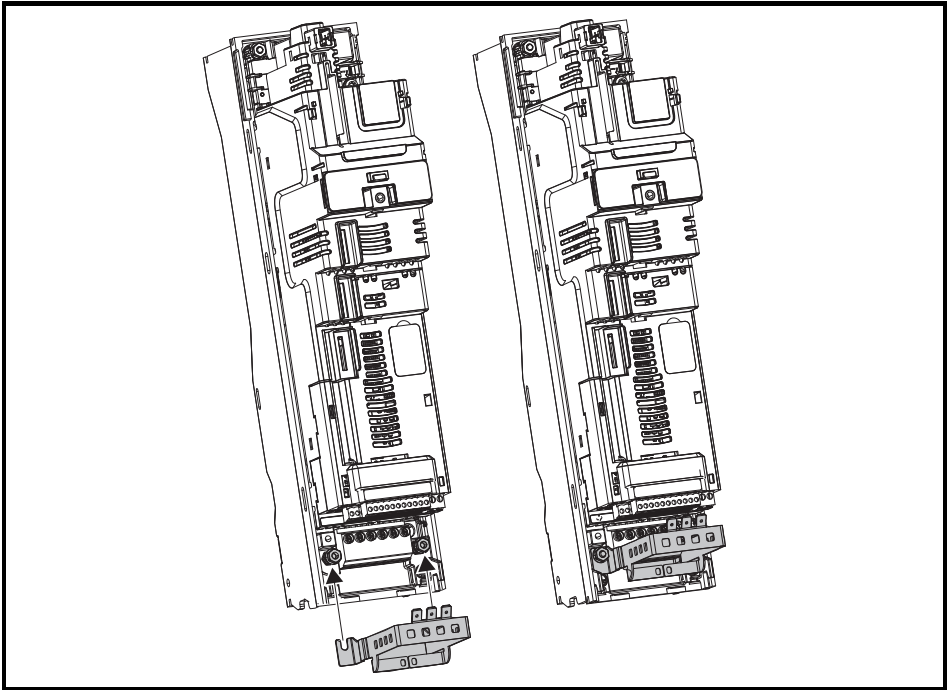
Installation of grounding bracket (all sizes -size 3 shown)
